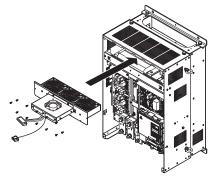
Install the Cooling Fan Unit: 2A0053 to 2A0105, 4A0053 to 4A0300
